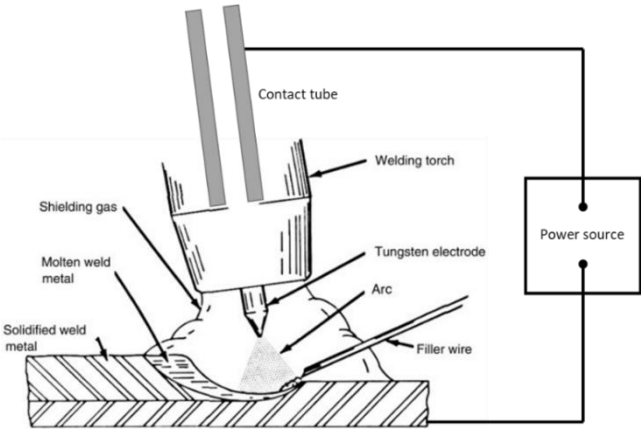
Schematic illustration of welding area in GTAW [Has14].
